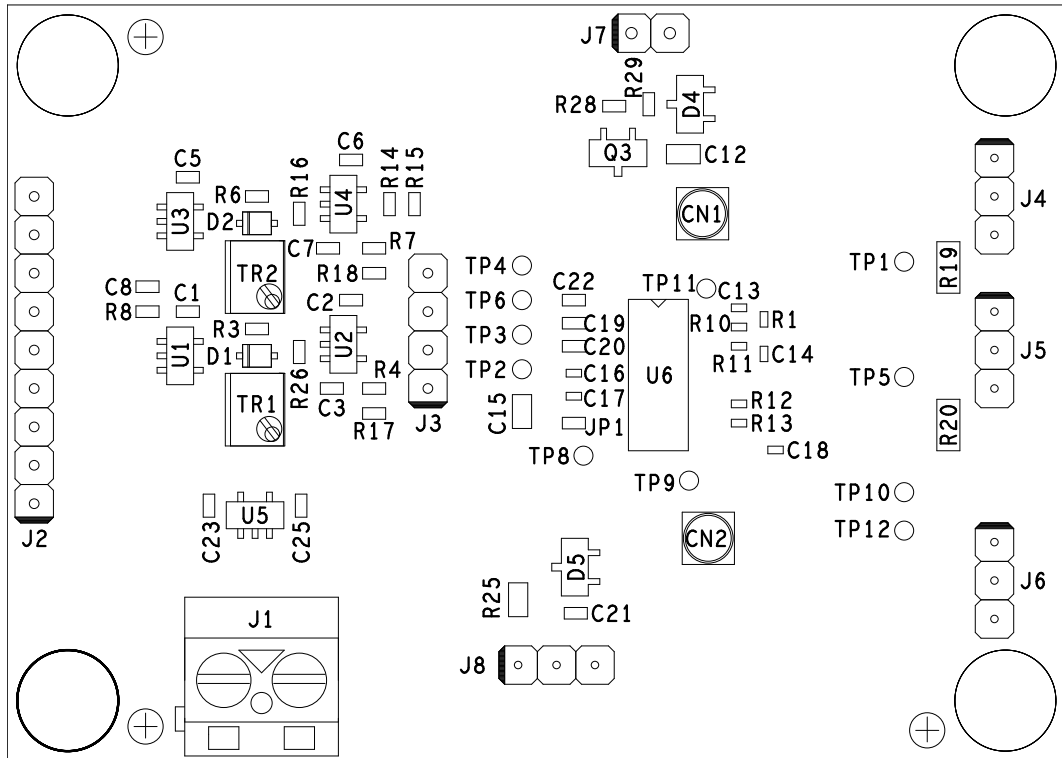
EVSTDRIVEG600DG - Layout (component placement bottom view)
